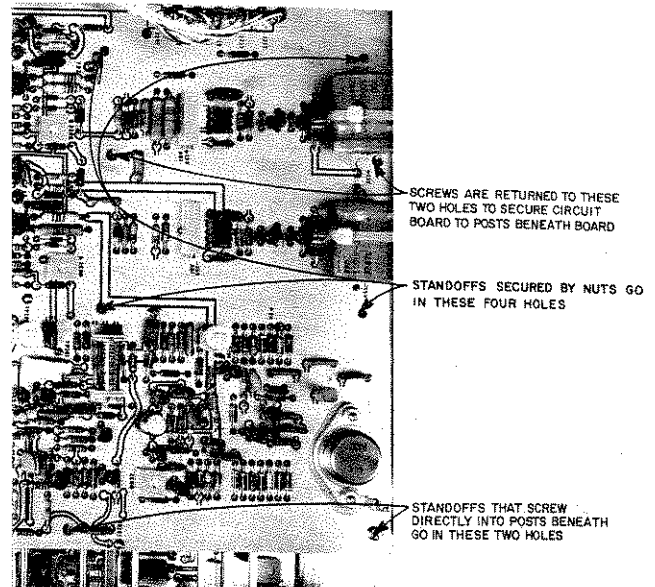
MODEL 162 UPPER CIRCUIT BOARD SHOWING DIGITAL STORAGE OPTION MOUNTING HOLES
